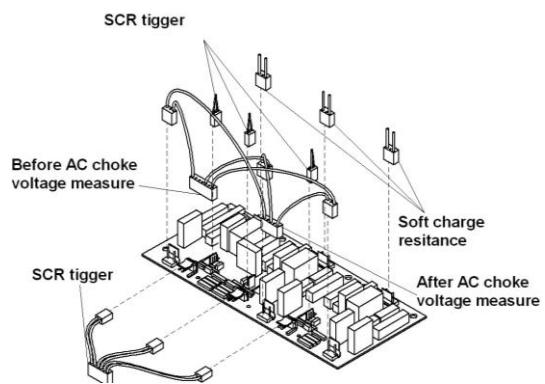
(b) Disassembly of the Snubber, Trigger and Soft charge protection
